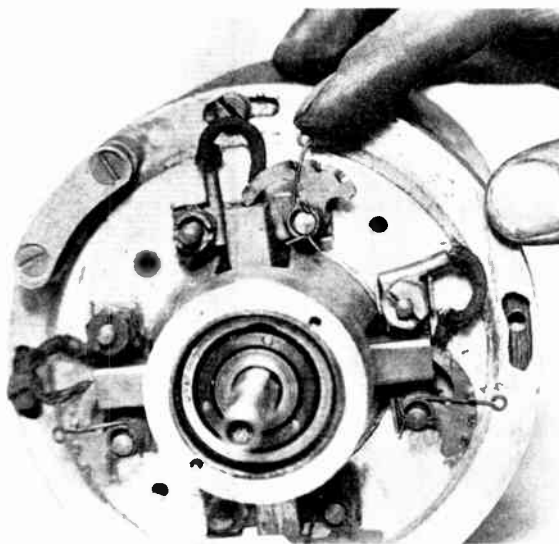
ADJUSTING SPRING TENSION ON BRUSHES OF CAR DYNAMO.
